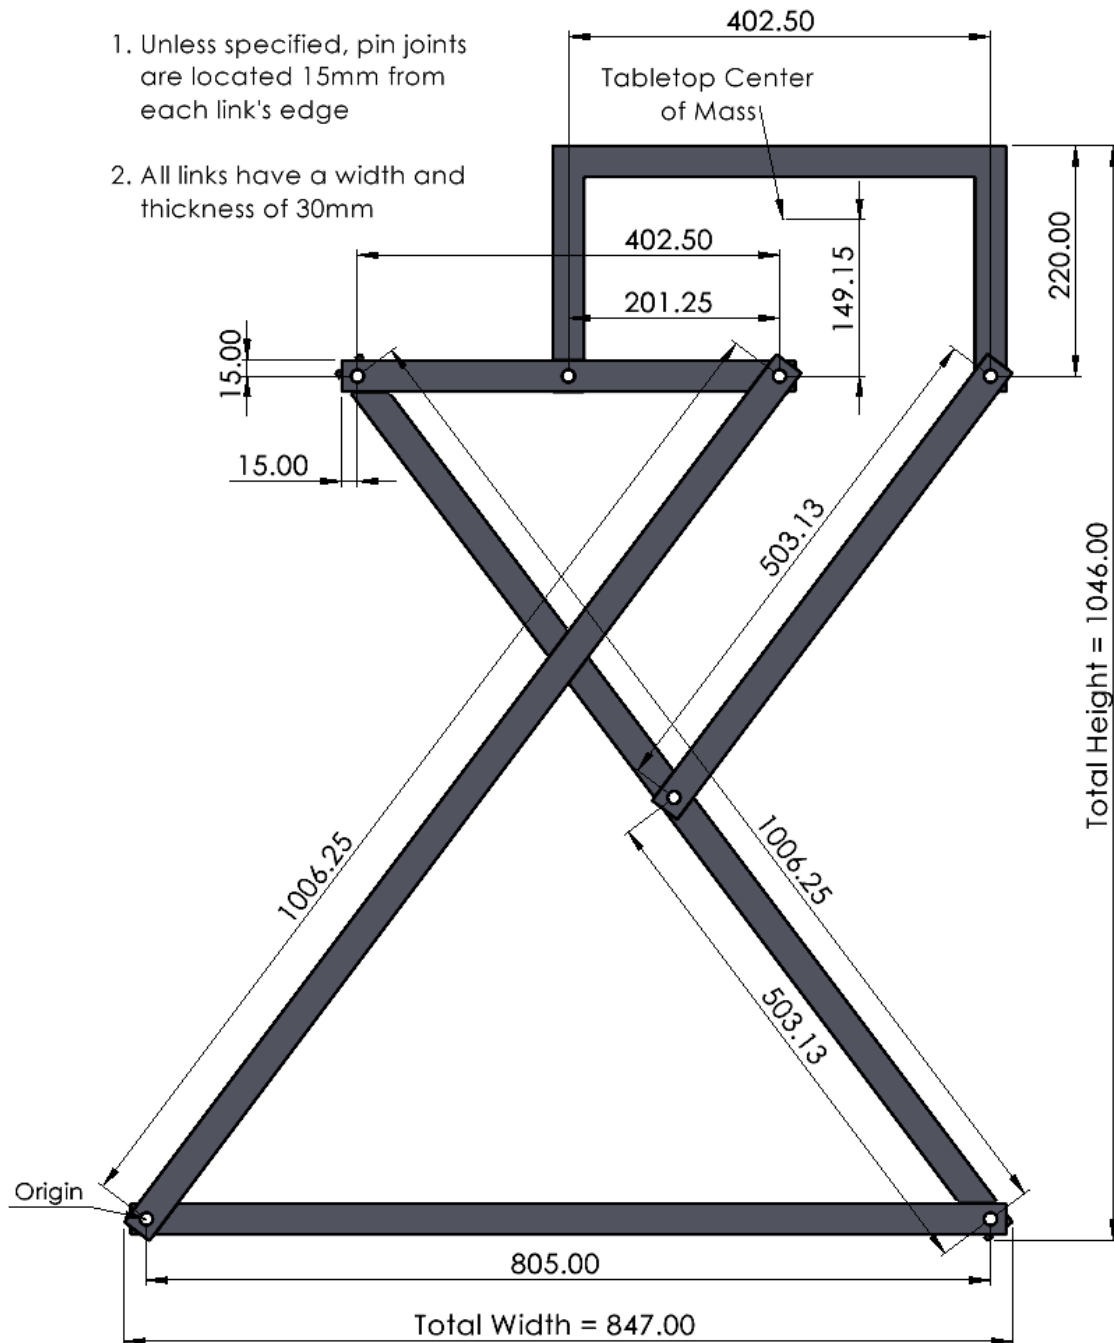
Final Dimensions of Mechanism (all in millimeters)
